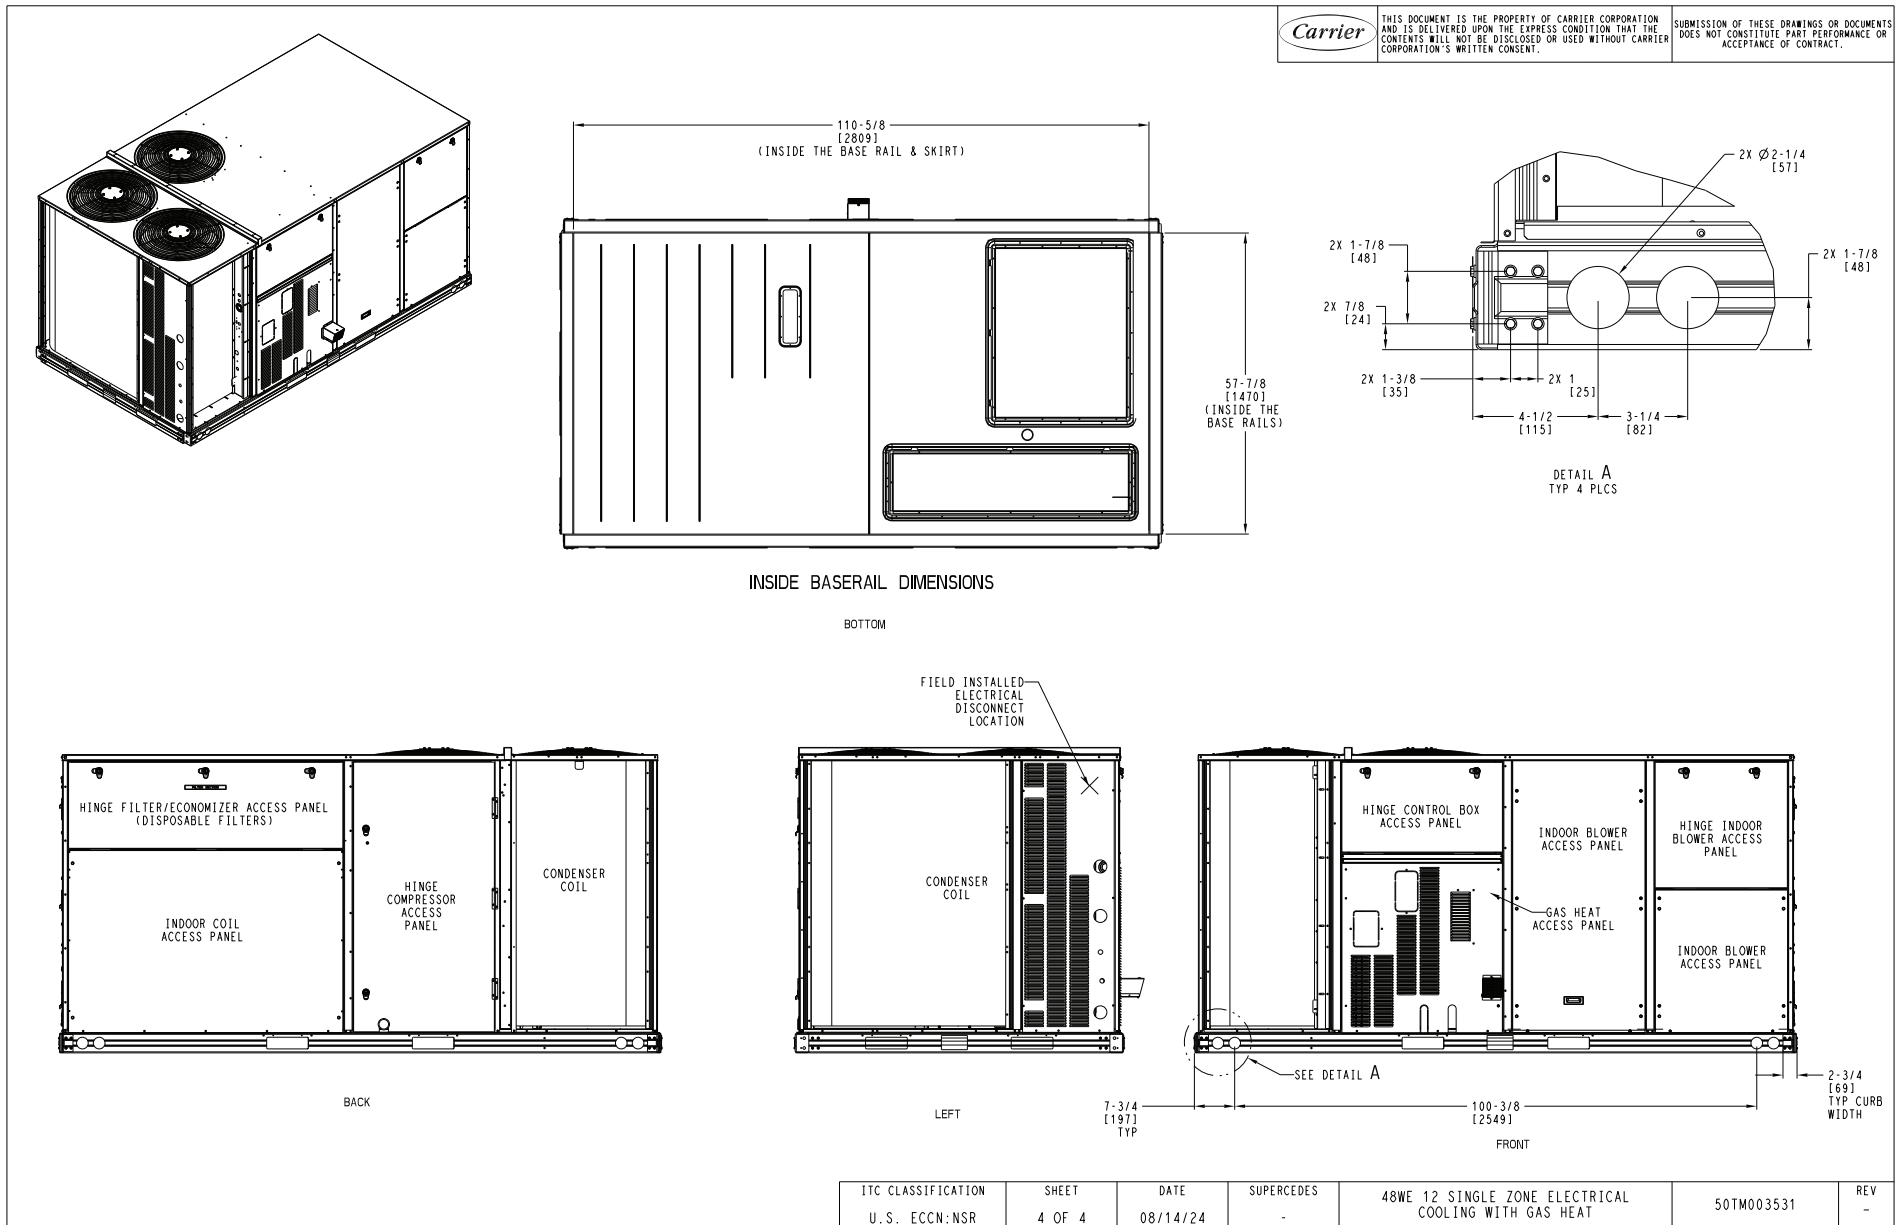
Unit Dimensional Drawing, 48WE*H12, Single-Zone Electric Cooling with Gas Heat (cont)
